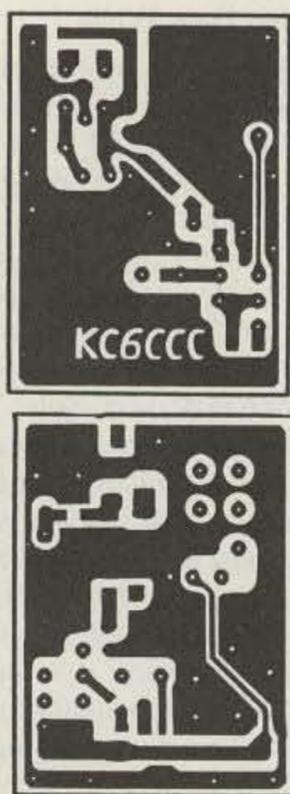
PC board foil patterns. (a). Bottom layer. (b). Top layer. Use a #74 size drill bit for all holes. Be sure to solder jumpers between the top and bottom layers where indicated for efficient grounding.
